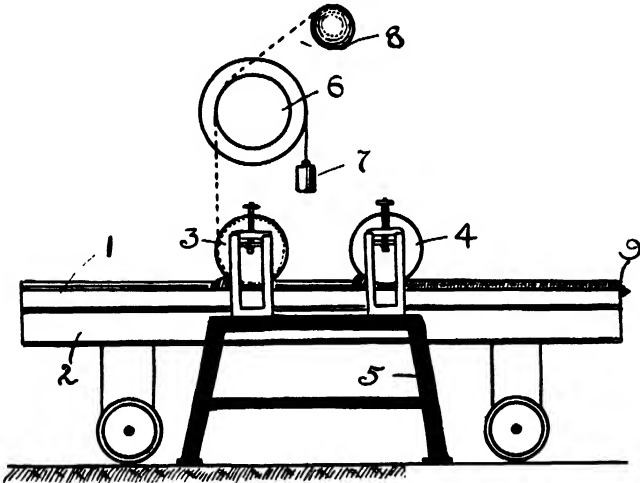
APPERT'S MACHINE FOR MAKING WIRE GLASS.
